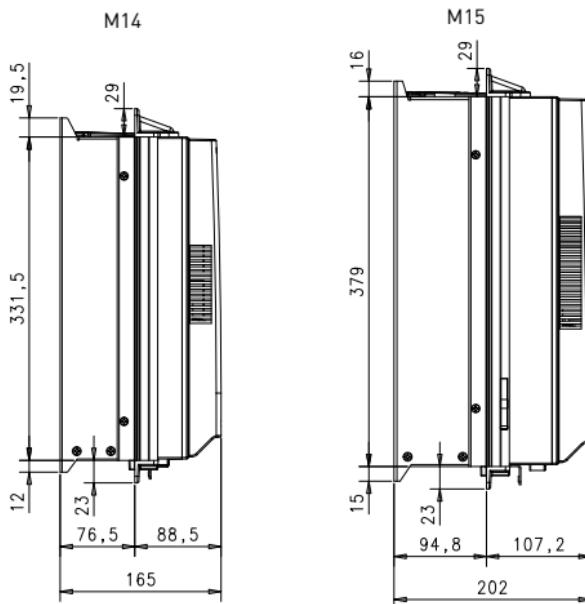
Flange mounting depth dimensions for M14 and M15 (Unit: mm)
